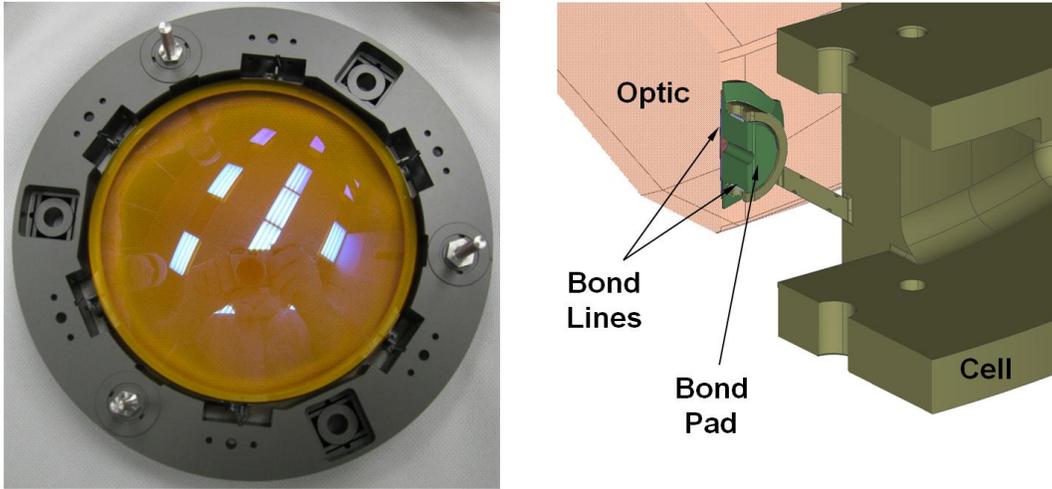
Bonded ZnSe Flight Lens Cell (left), Cutaway View at Bond Pad (right) [12]
